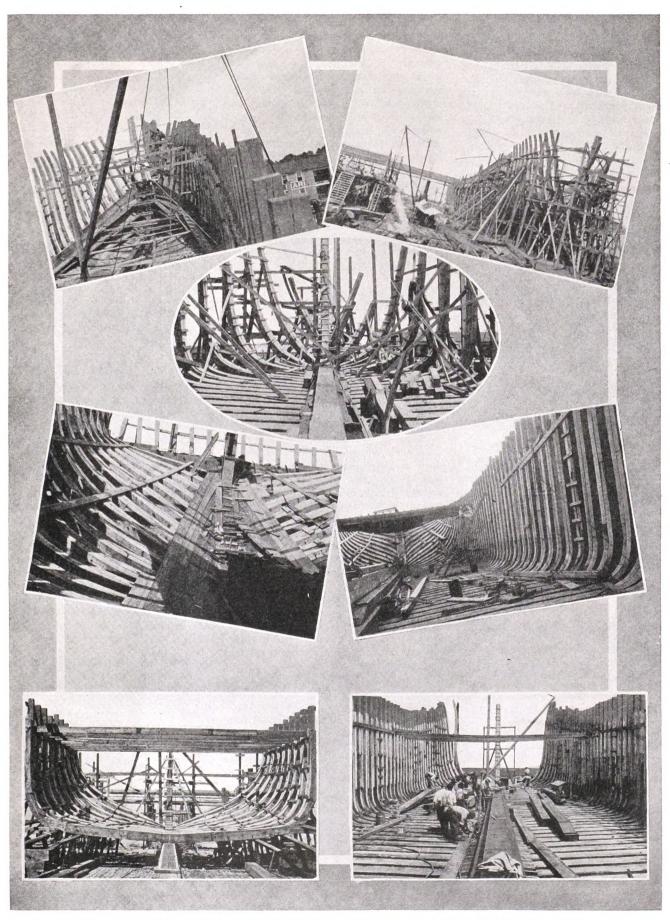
TYPICAL CONSTRUCTION VIEWS IN A SOUTHERN WOODEN SHIP BUILDING YARD
